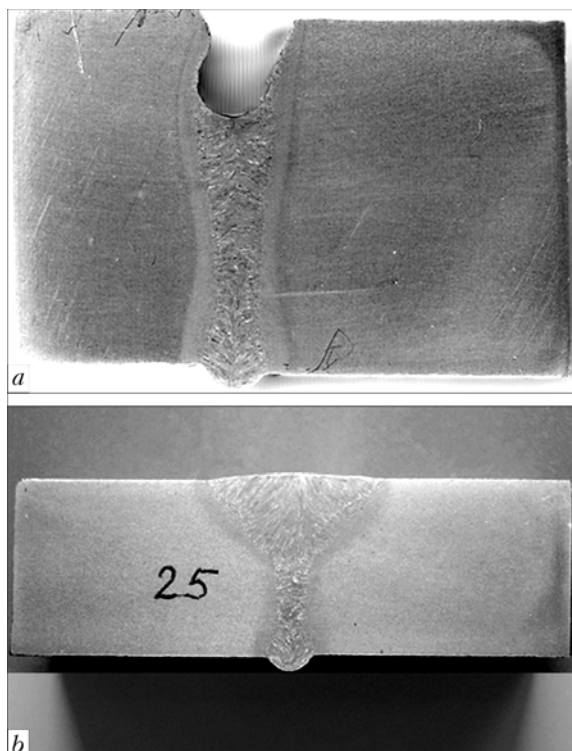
shows transverse macrosections of the weld on the 20 mm thick material after the first pass made by EBW and second pass made by submerged-arc welding. Both passes were made without any edge preparation. Static tensile tests in compliance with
